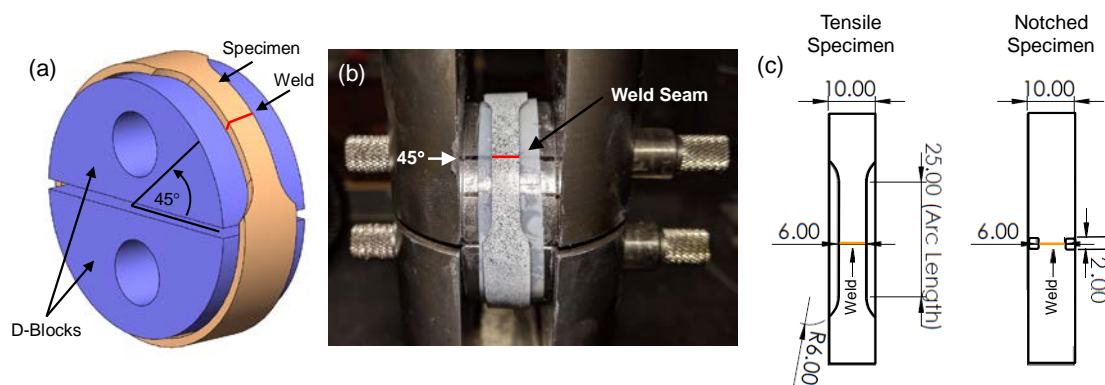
(a) A solid model image of the ring hoop tension test (RHTT) tools and specimen used in this work. (b) A photograph of a speckled tensile ring specimen with the weld seam shown at the 45° orientation within the RHTT. (c) The Tensile and Notched ring specimen geometry used in this work. Dimensions are in mm.
